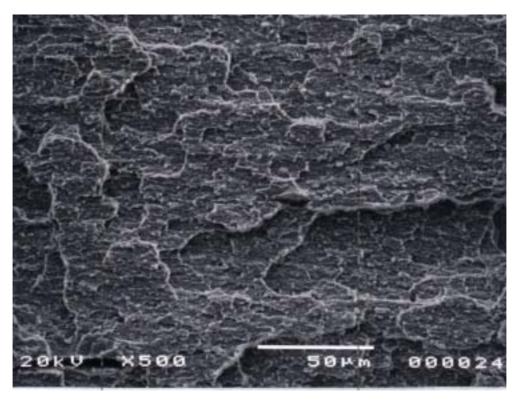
Brittle fracture pattern observed on the DHC fractured surface of the Zr-2.5Nb tube.
